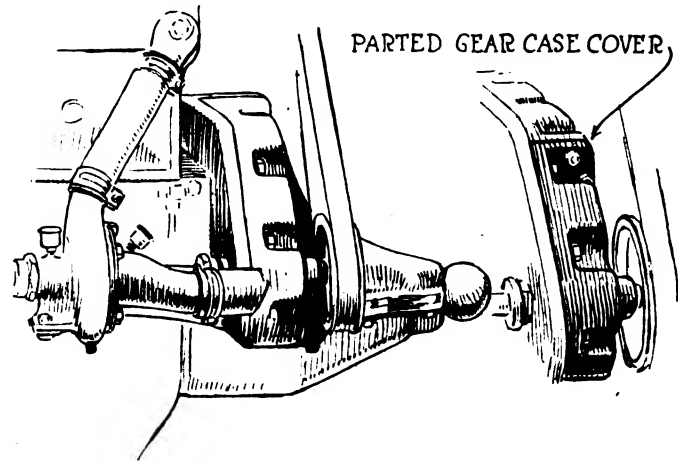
PROVIDING A PARTED GEARCASE COVER TO FACILITATE DOING WORK ON THE PUMP DRIVE GEAR HAS REDUCED THE MAINTENANCE COST MATERIALLY
